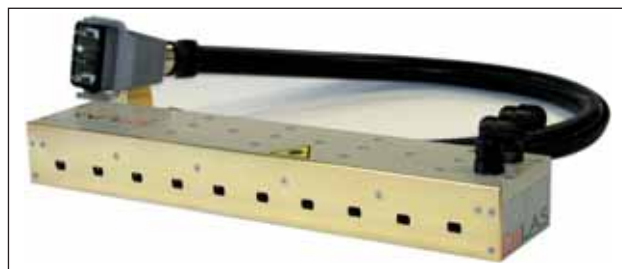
Customized laser module for simultaneous spot welding.
